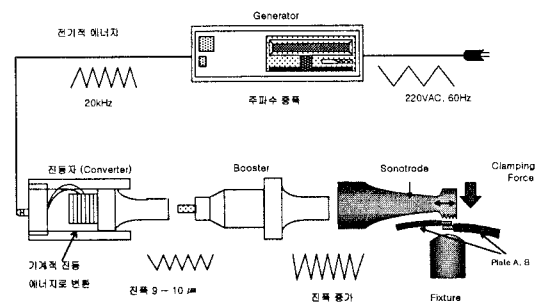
Schematic diagram of ultrasonic welding machine
